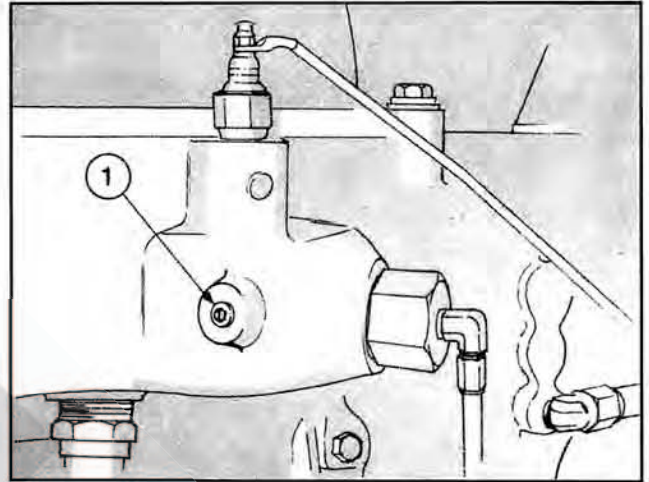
6, (OM1006L). Glow plug inspection hole, NT-855 C.I.D. Engine
